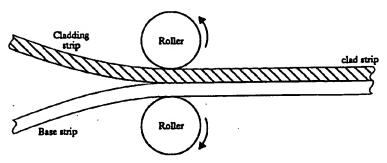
Schematic of a typical roll welding process producing clad metals.
